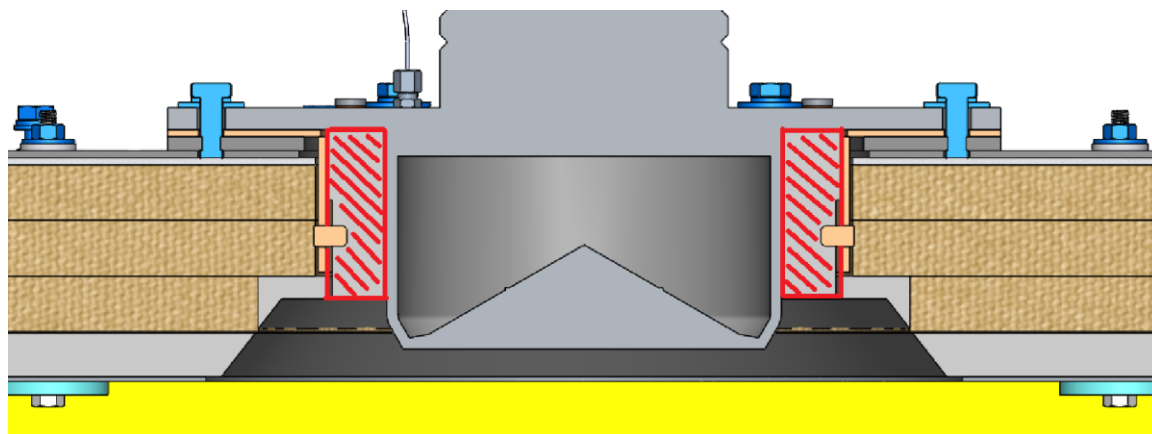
Superwool (represented in red) between the burner nozzle mounting bracket and the burner
